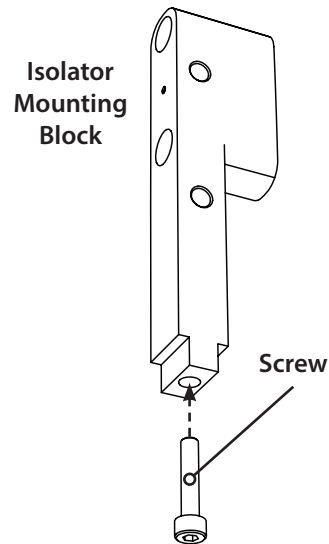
Close-Up of Isolator Mounting Block (Exploded View)
